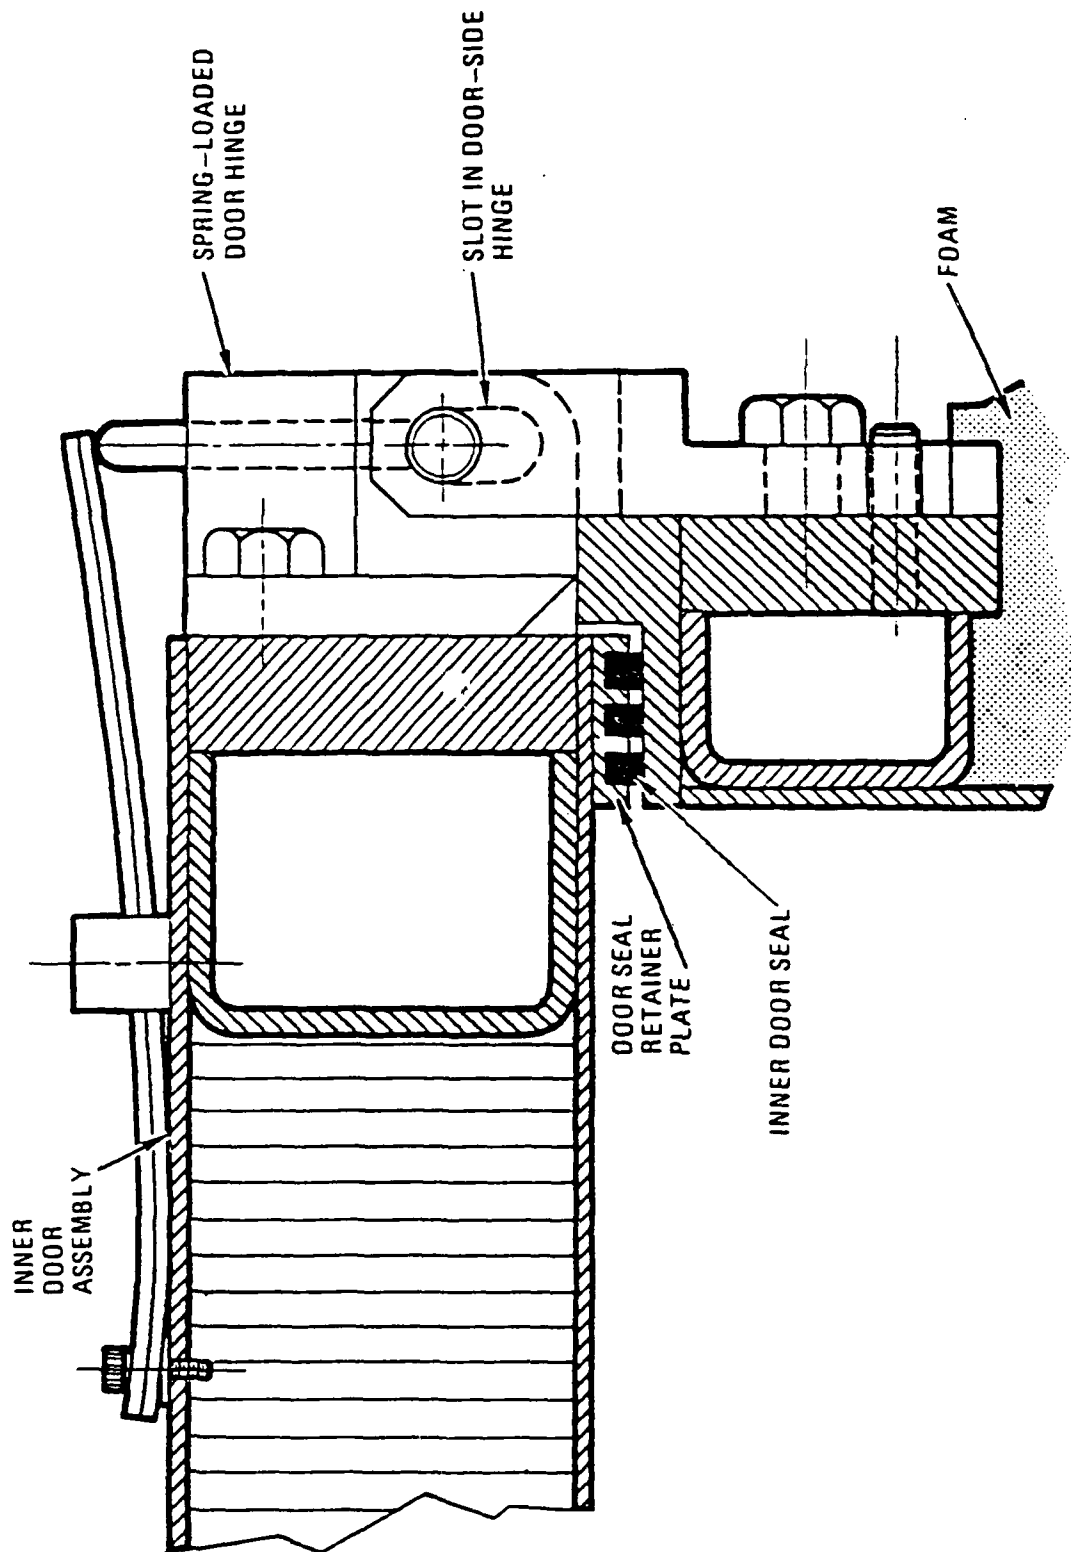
Detail of inner door seal and hinge [Ref. 2]
